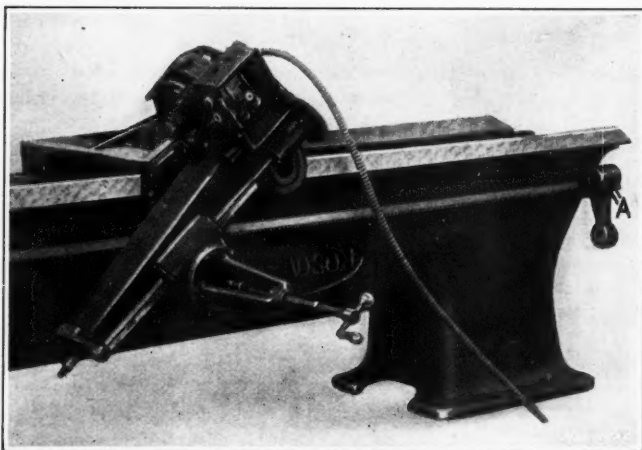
Radial Drilling Machine drilling Holes for Screws used to secure Feed Rack to Bed
